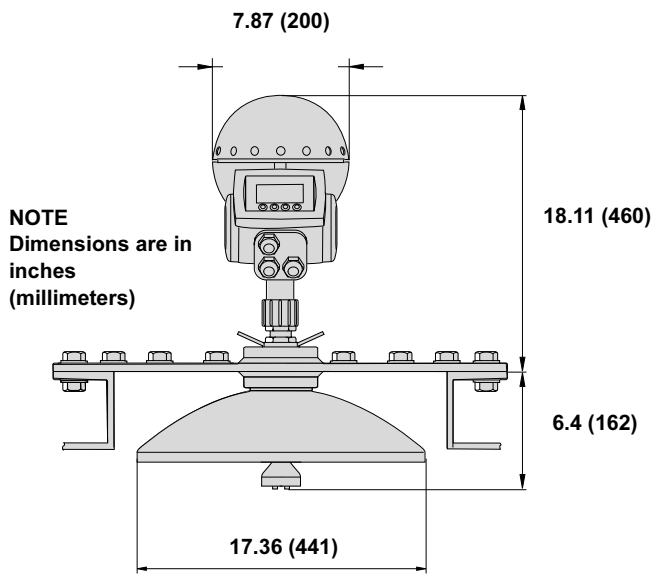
Cone with Integrated Flushing Connection Dimensions for Stainless Steel Flange
